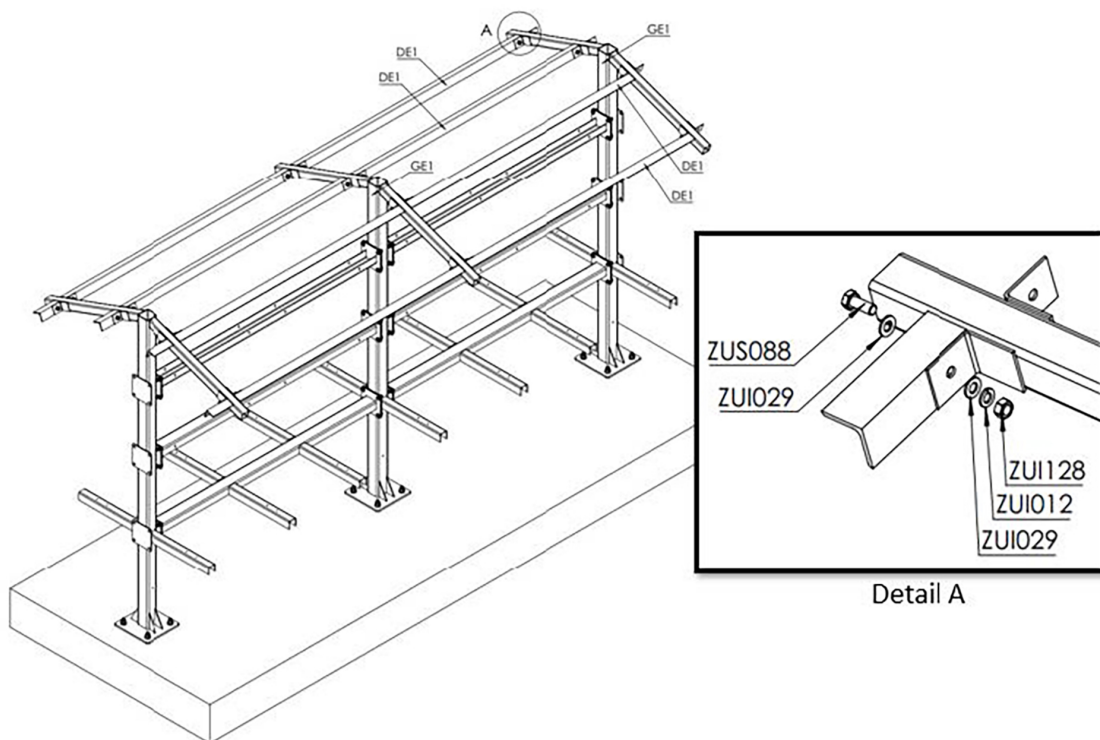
Assembly — Inverter rack — DE1-2, GE1 (detailed view)
